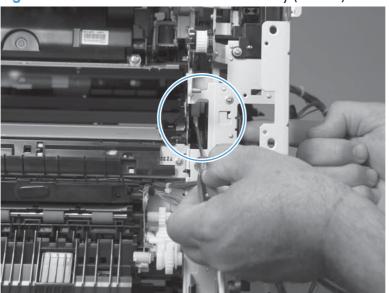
Reinstall the main drive assembly (9 of 11)
